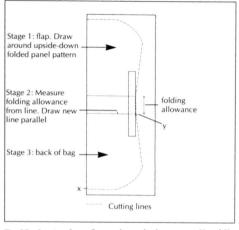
Cutting front flap and rear body pattern: Y and X to be transferred to cutting pattern.
